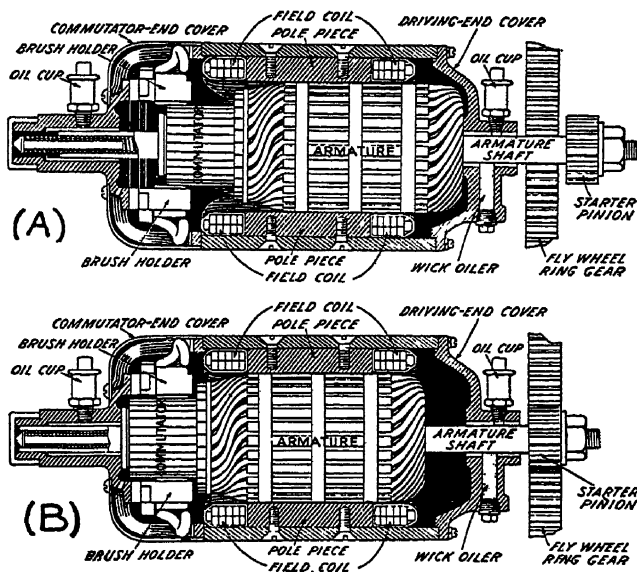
Sectional views of Rushmore starting motor with magnetically shifted armature for engaging pinion with flywheel. (A) Showing pinion out of engagement (B) Pinion engaged.
